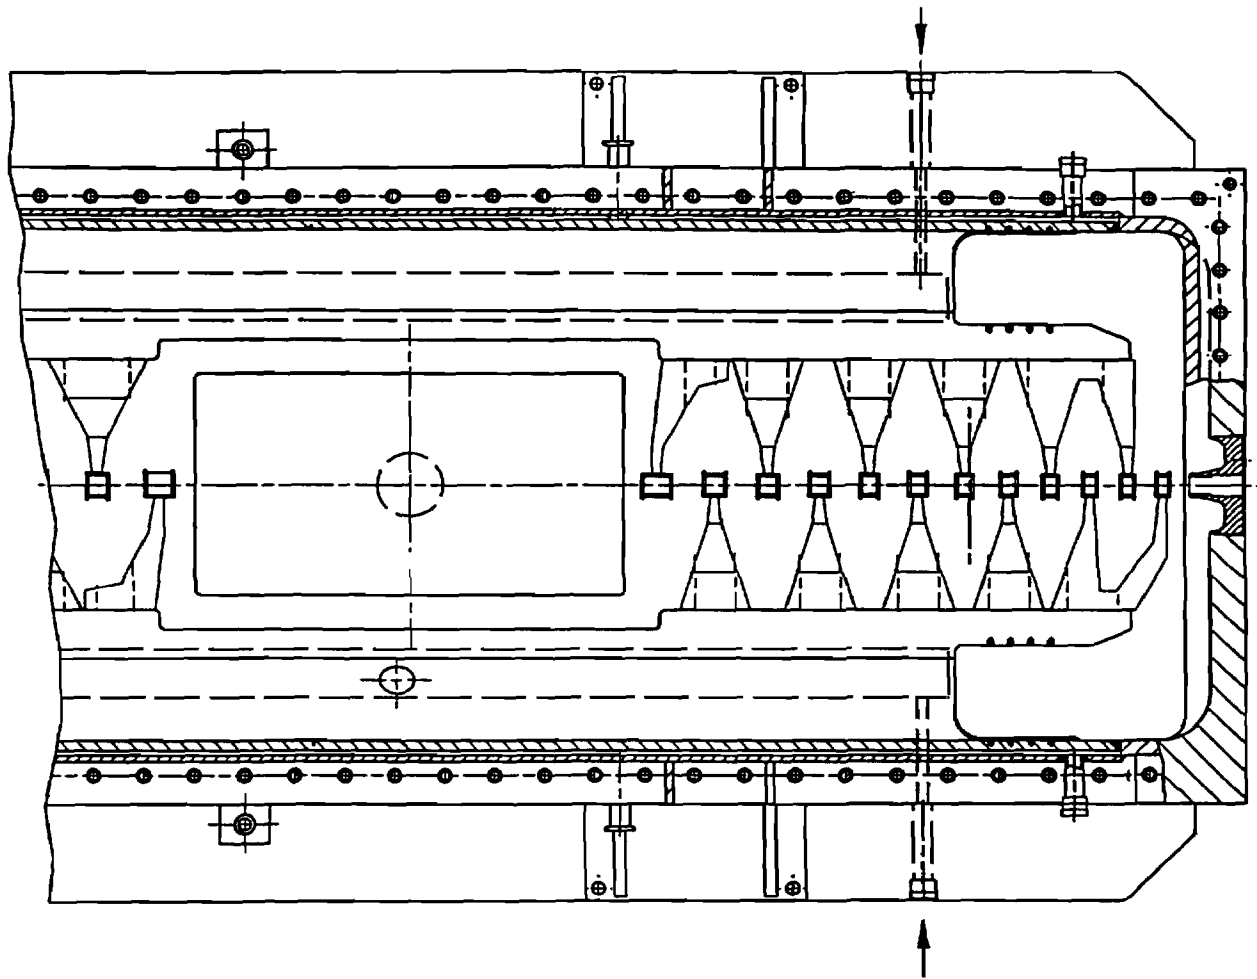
Cross Section of Tank 1 Showing Small Drift Tubes
